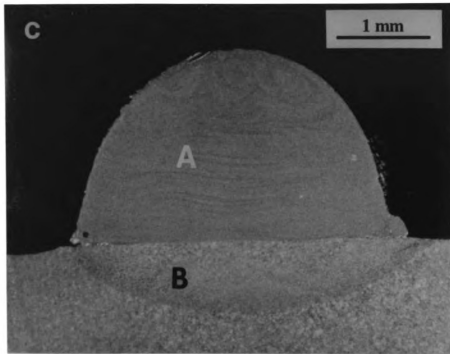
Three basic single clad bead profiles. (a) Deep penetration clad bead.
